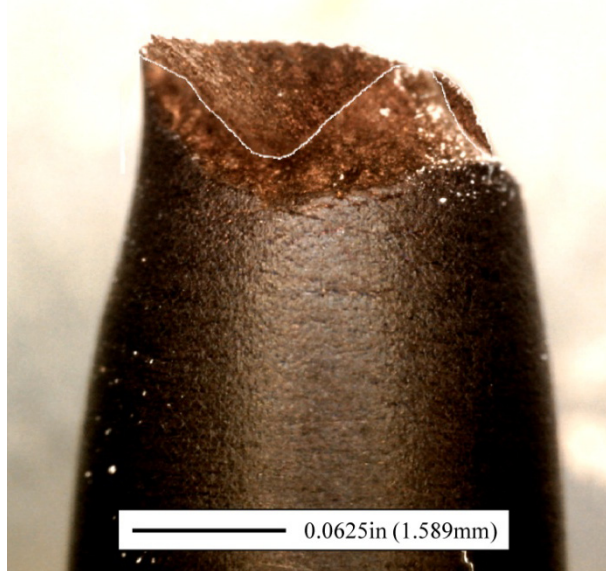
Fracture surface of tensile specimen, Ten1, tested at 68°F (20°C).
